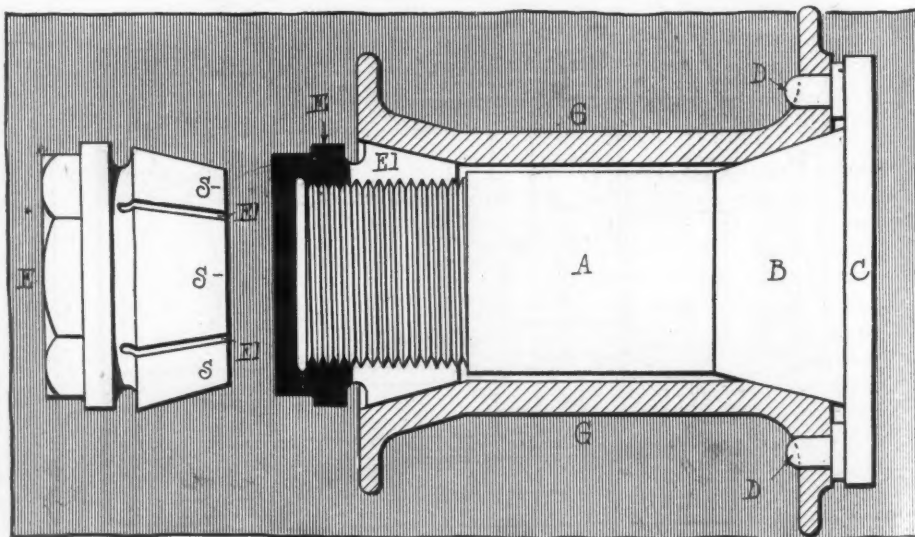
THE JACKSON DEMOUNTABLE WHEEL
